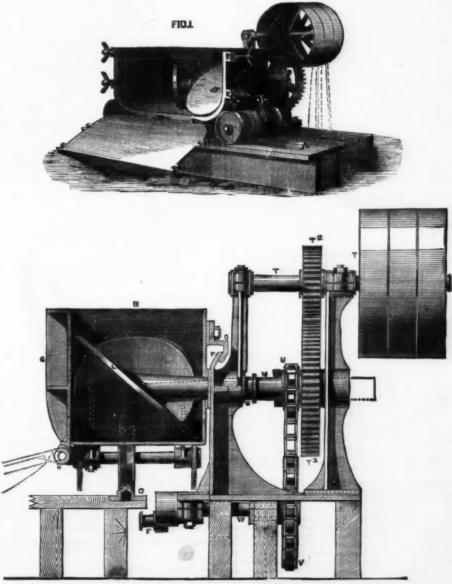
IMPROVED MORTAR MIXING MACHINE.
